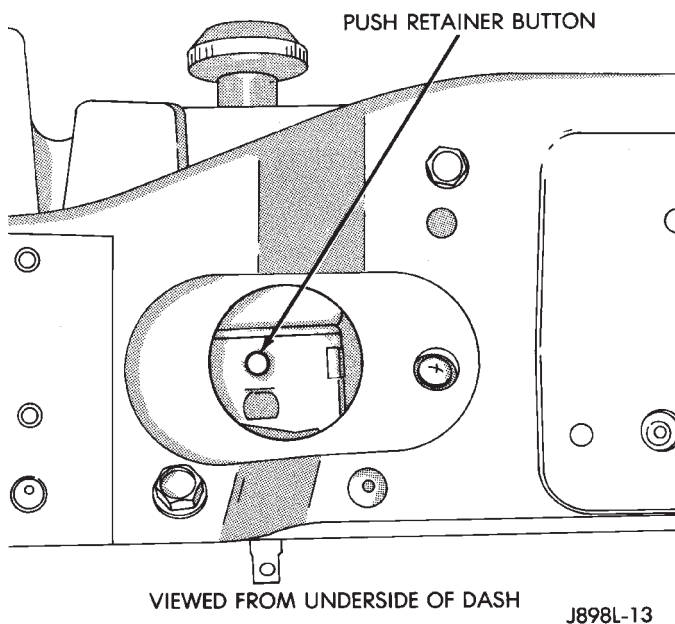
Headlamp Switch Knob And Shaft Remove/Install
